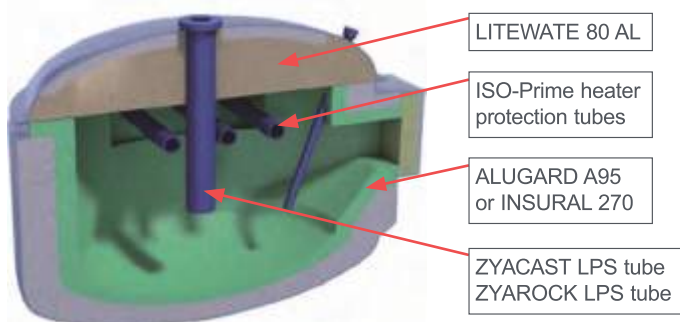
Low-pressure furnace showing different refractories used, LPS riser tube and heater protection tubes
